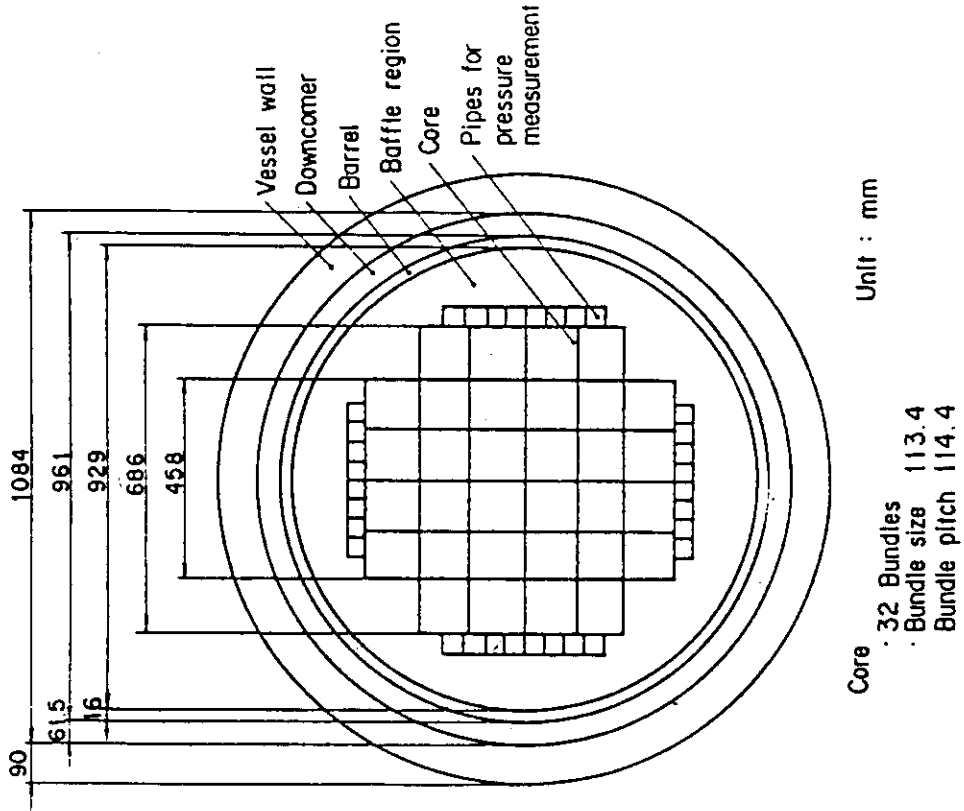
Dimension of CCTF Core-II pressure vessel cross section
